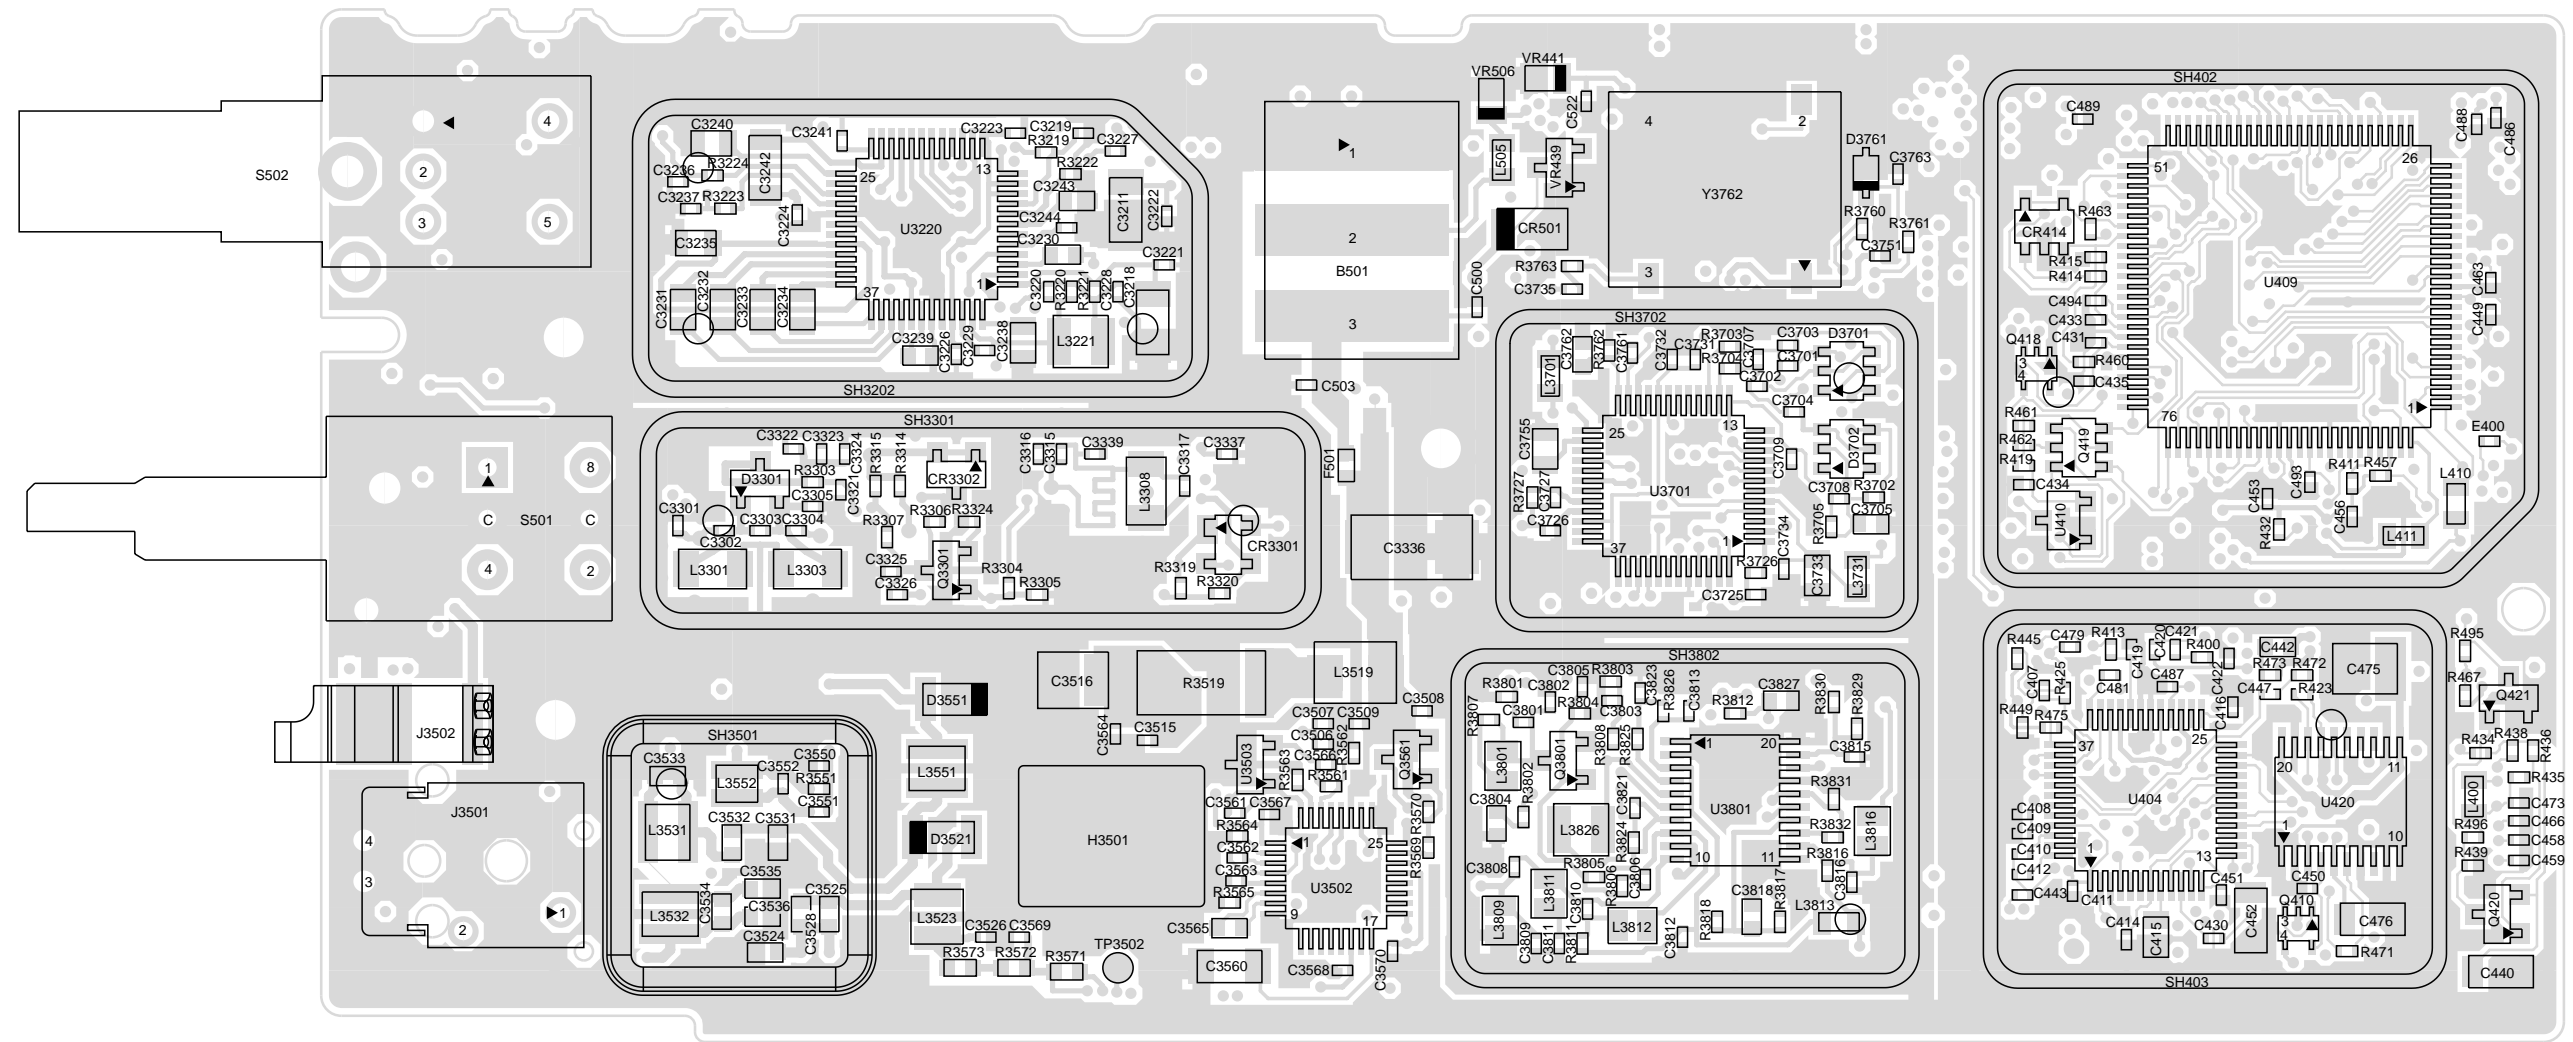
VHF (136-174MHz) Main Board Top Side PCB
